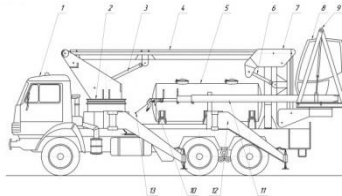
Bar-holding deicing vehicle of stand-acting type: 1 – vehicle chassis; 2 – boom turret; 3 – boom elevating cylinder; 4 – boom; 5 – ADF tank; 6 – cabin leveling cylinder; 7 – cabin holder; 8 – operator's cabin; 9 – bar leveler; 10 – deicing bar nozzle; 11 – deicing bar; 12 – vehicle's stand satabilizers (cabin operated); 13 – bar to airframe contact protection sensor.
